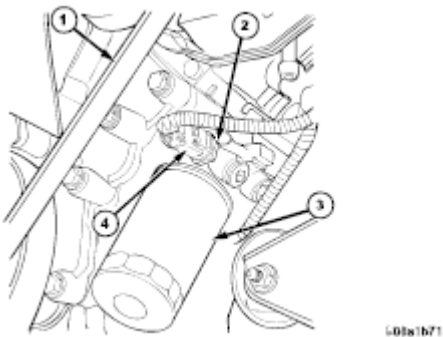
Identifying Oil Pressure Sender Connector And Pressure Sender
